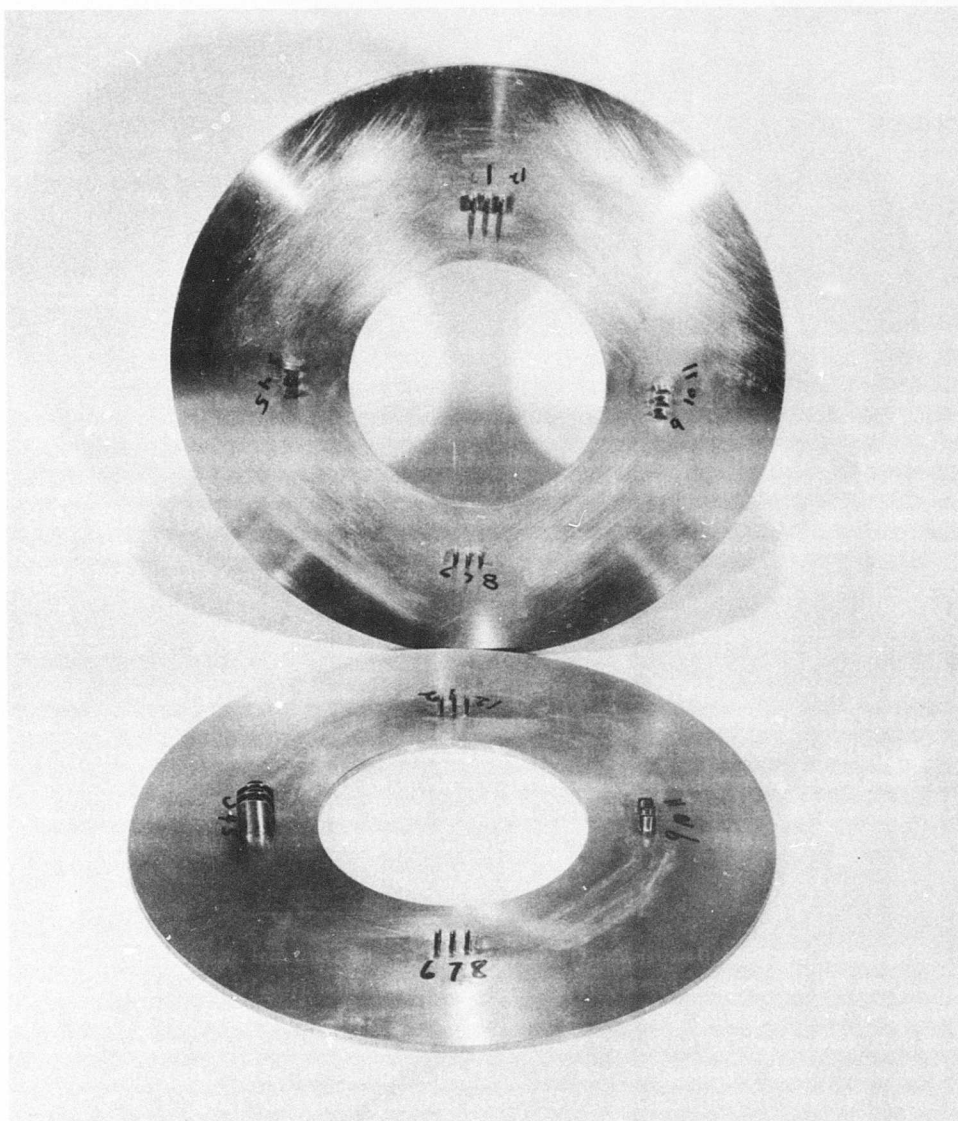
Blade Attachment Test Pieces of 6-6-2 Titanium With Shear Lug Design.
